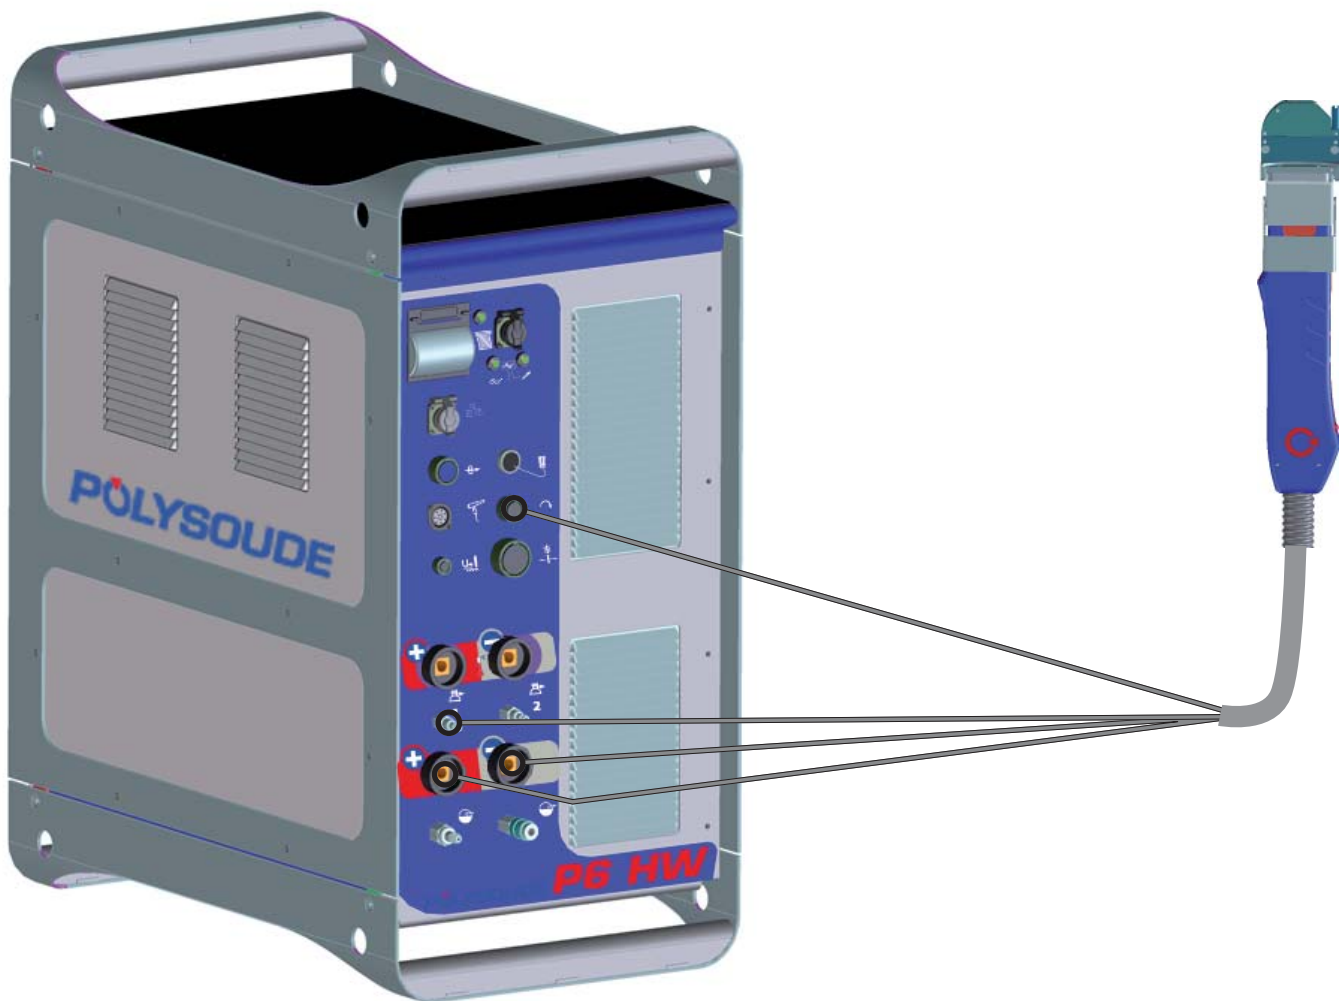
Connection of a gas cooled closed chamber welding head
